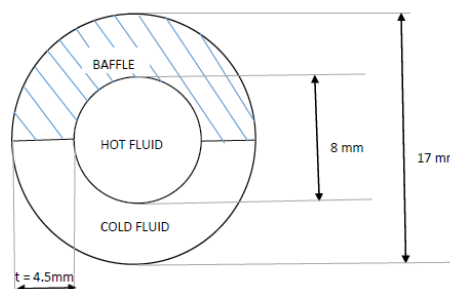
Cross section of helical coil tube in tube heat exchanger at the baffle
